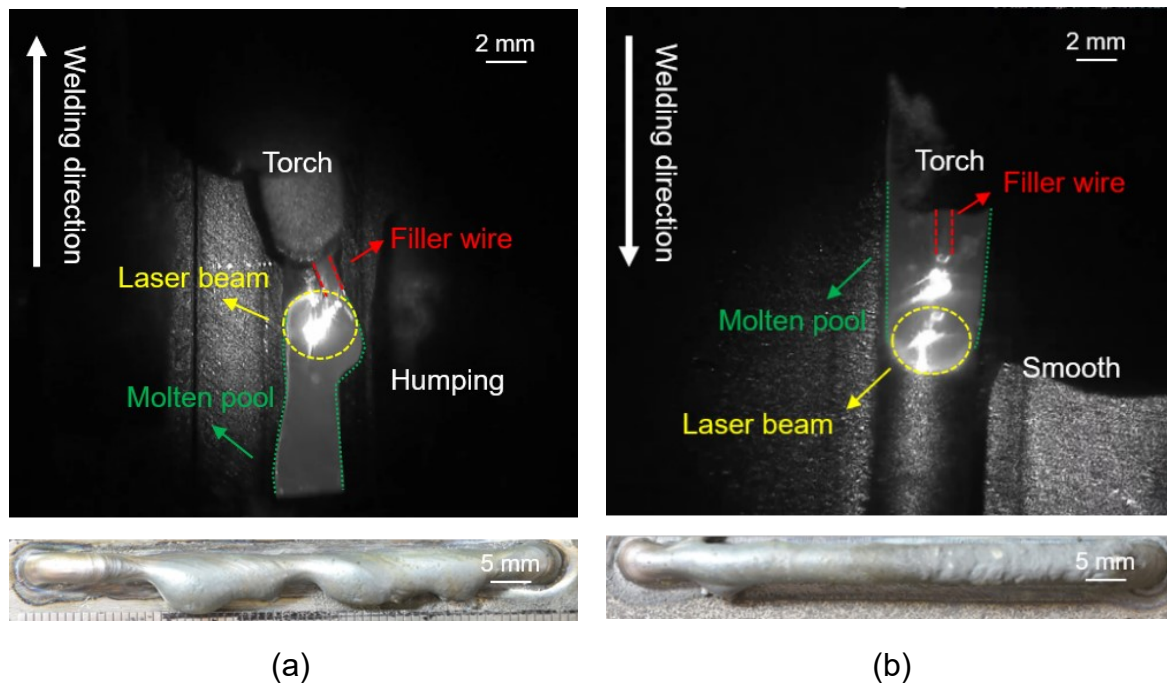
Typical high-speed images and bead appearance of welding direction: (a) Wire leading; (b) Laser leading.
